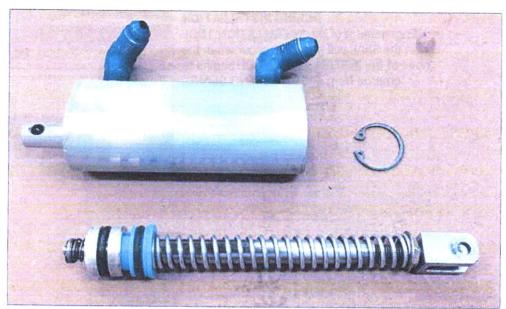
REASSEMBLED BRAKE MASTER CYLINDER COMPONENTS READY FOR FINAL ASSEMBLY.
